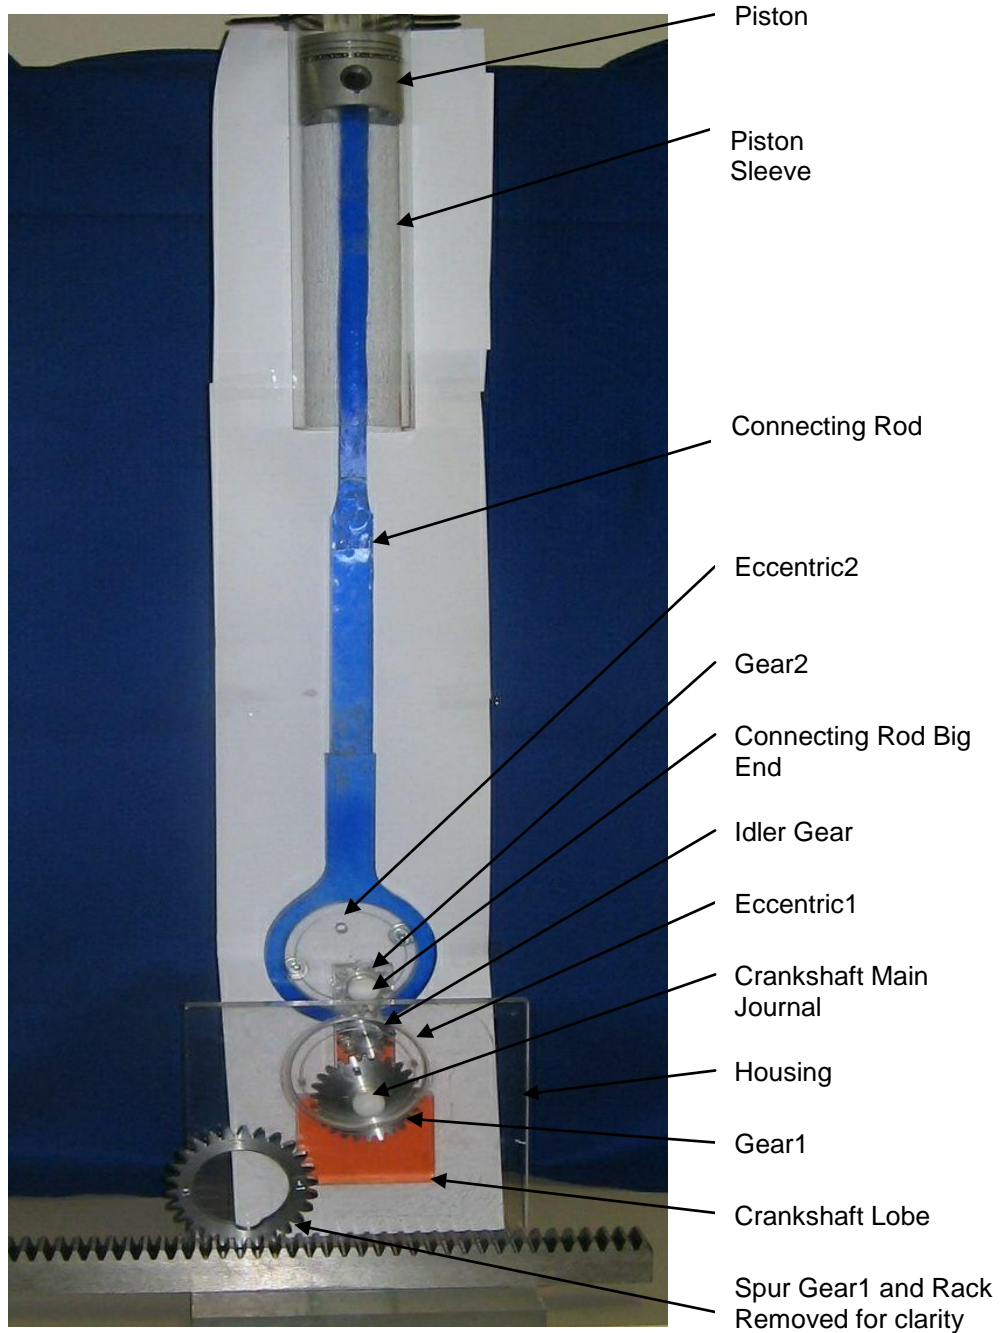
Physical Model of Variable Crankshaft Mechanism
